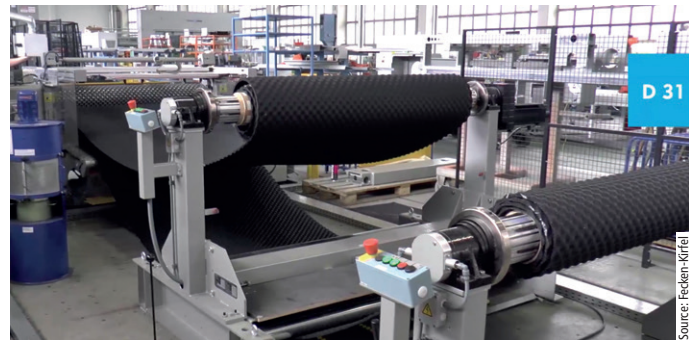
R 24 bandknife peeling machine – the cylinder is secured using a special clamping device.
